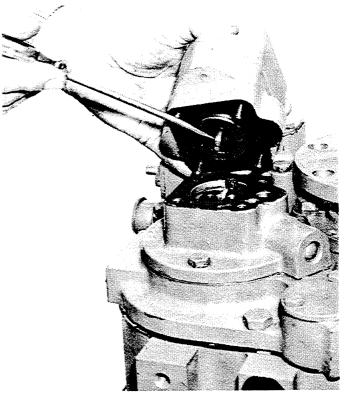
Installing Oil Pump with Care to Align Drive Tang.
